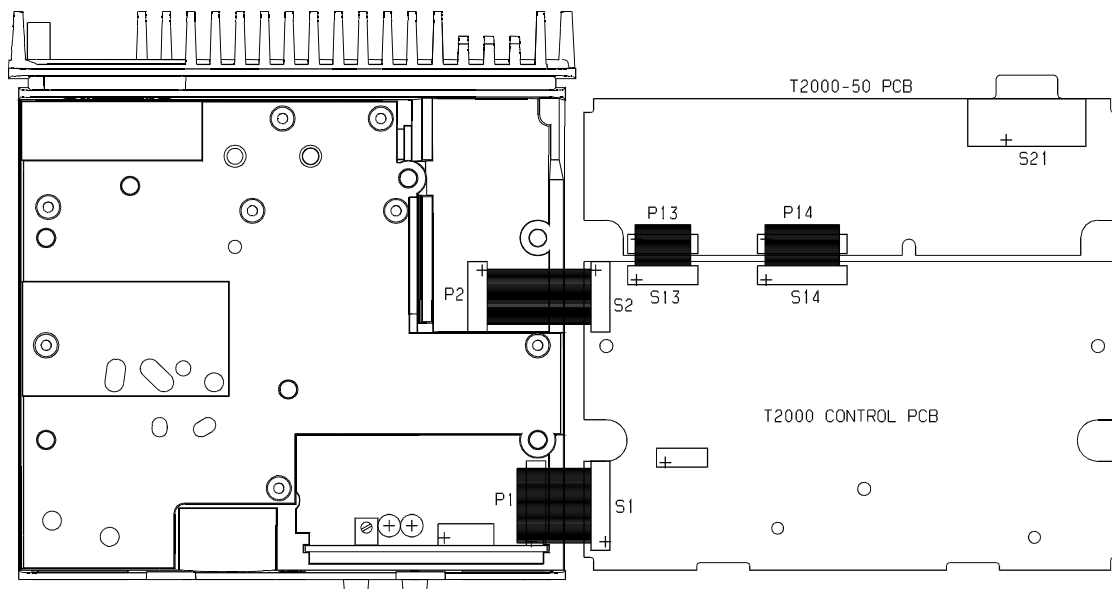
T2000-50 Handsfree PCB Mounting
